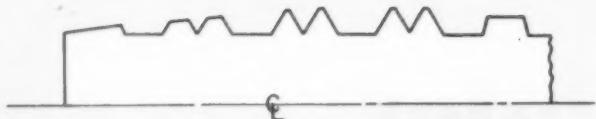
Pilot end of the single-pass Acme tap has leadscrew cutting teeth to draw the heavy Acme teeth through the workpiece.
